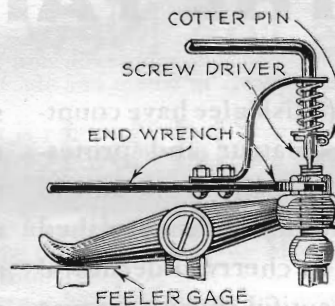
Timesaving tool for adjusting overhead valves fitted with slotted bolt and lock nut.
